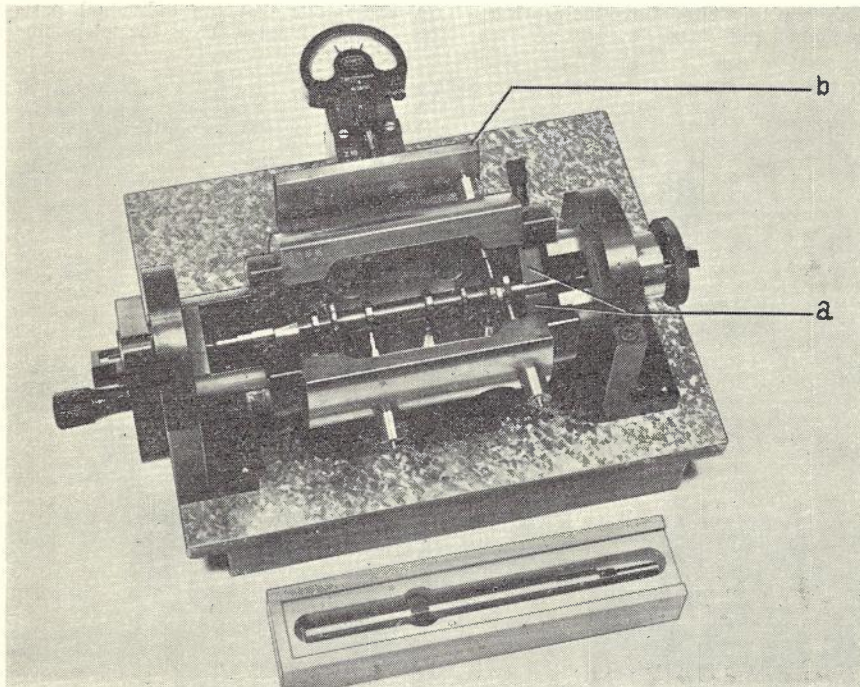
Text Fixture with Dial Indicator for Checking Printer Camshaft. In front: Measuring gauge for basic adjustment of fixture.
